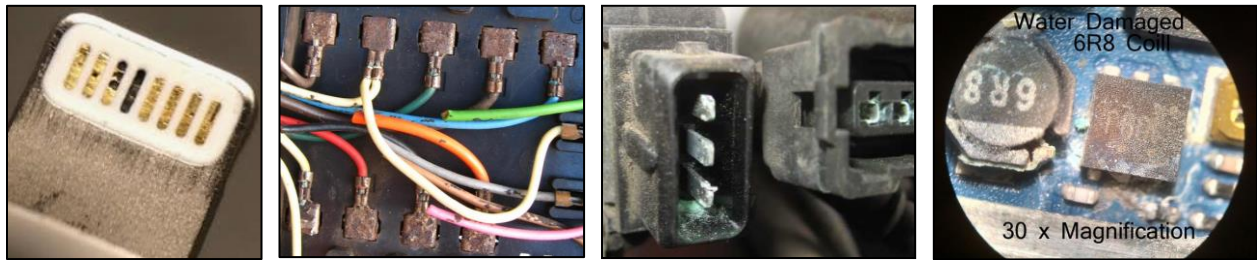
Examples of water damage and corrosion on electrical contacts
